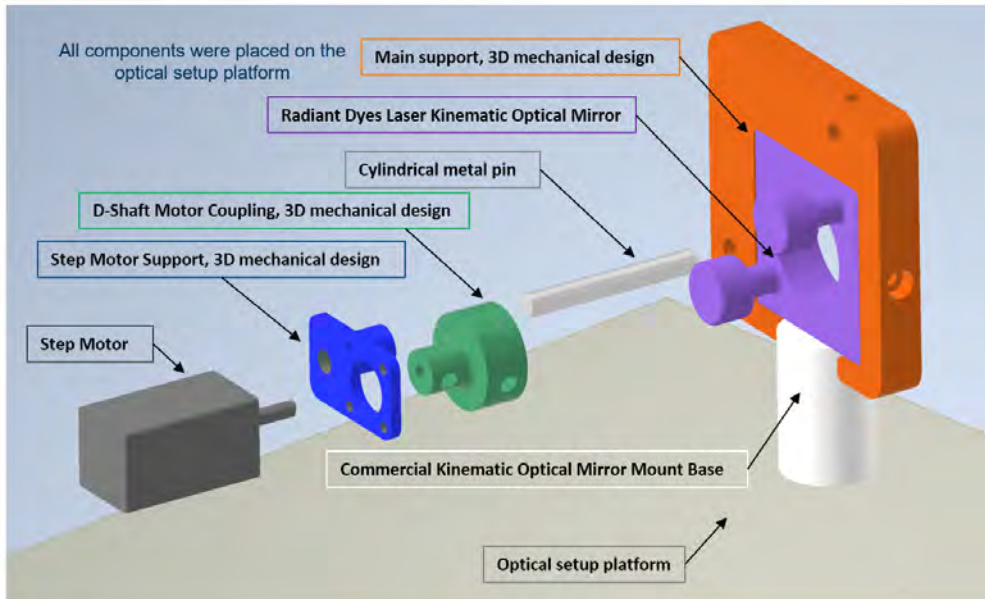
Exploded view of the mechanical system for Radiant Dyes Laser Kinematic Optical Mirror
